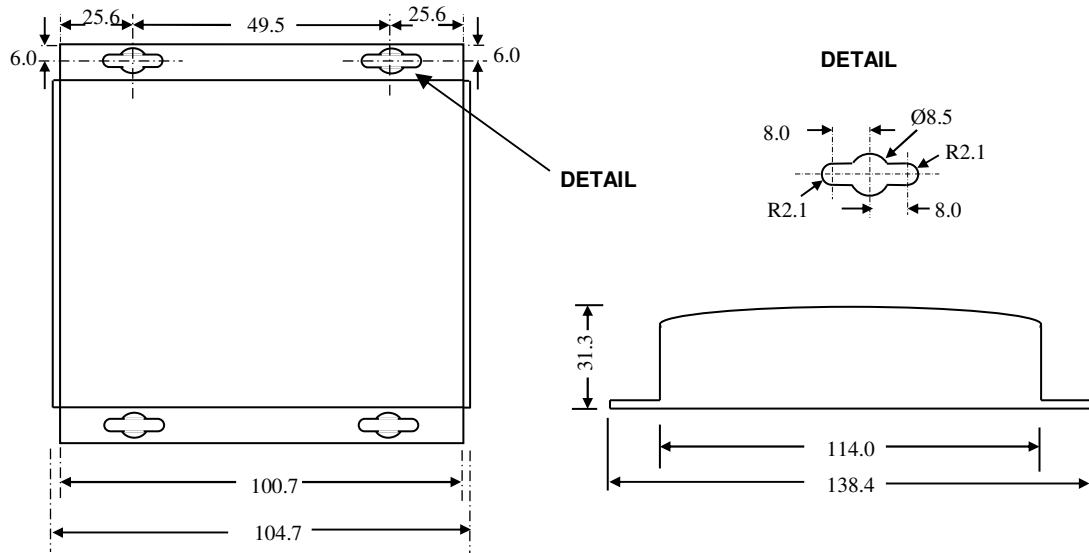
OSD2175MP/48VDC MOUNTING DIMENSIONS
